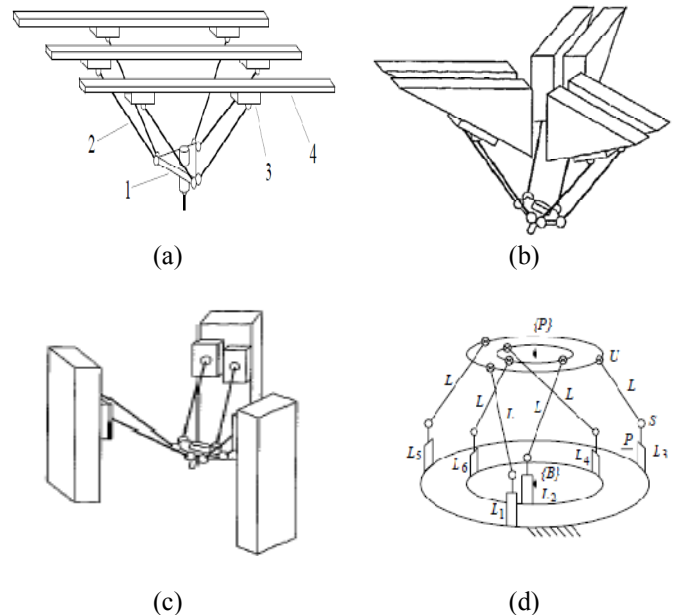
EXAMPLES OF 6-P-U-S PARALLEL MANIPULATORS (A) HEXAGLIDE ROBOT [14] (B) HEXA-M MILLING MACHINE [15] (C) ACTIVE WRIST [16] AND (D) 6-P-S-U PLATFORM [17]
